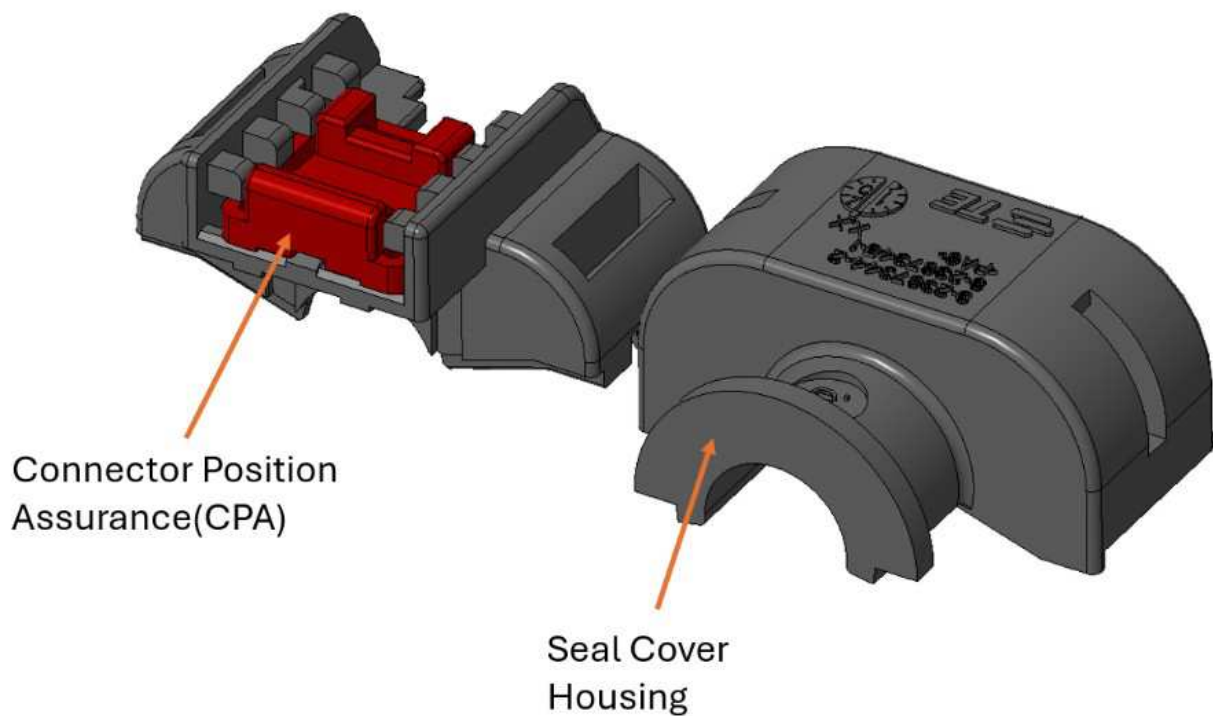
e: DT Highspeed Socket Seal Cover Assembly
